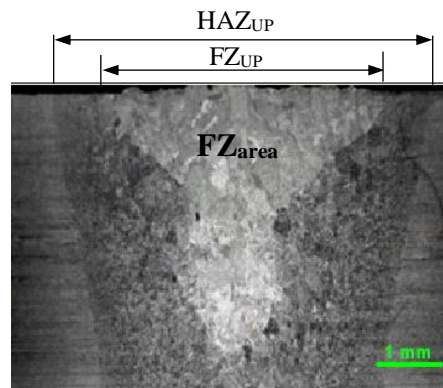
Weld bead macrograph at 1 mm defocused position ($P = 1800$ W, $V = 400$ mm/min)
